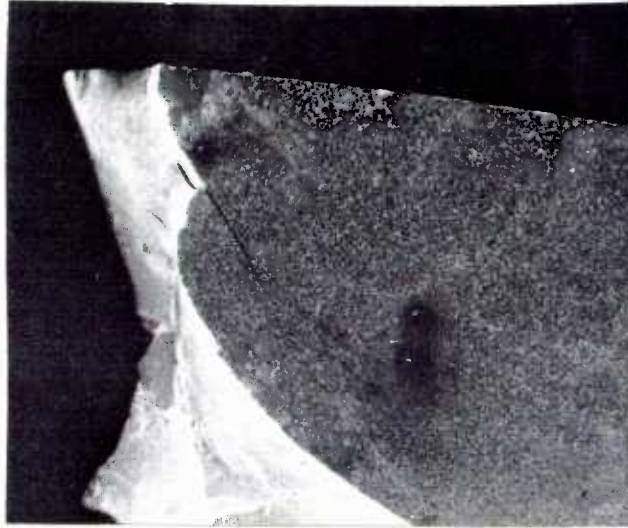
Brittle failure of a cutting tool near the end of chip-tool contact, Tlustý [27]
